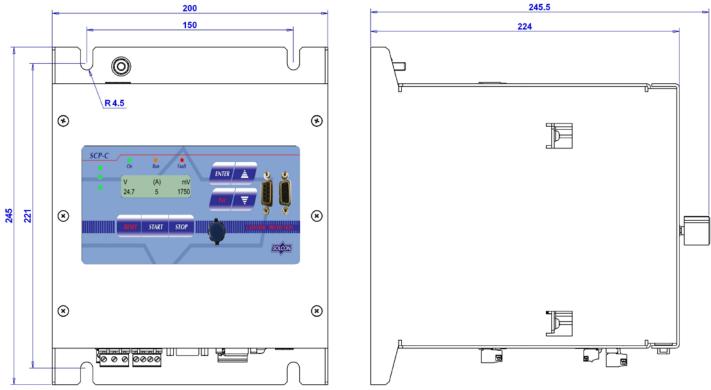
SCP-C 8A - Single Phase Input – Dimensional Drawing
